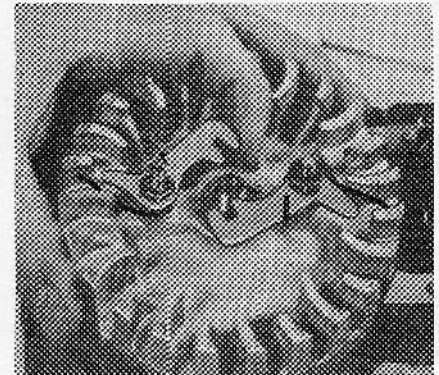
The starter pawls and springs should be installed as shown. A balance weight may be used with only one pawl assembly.
